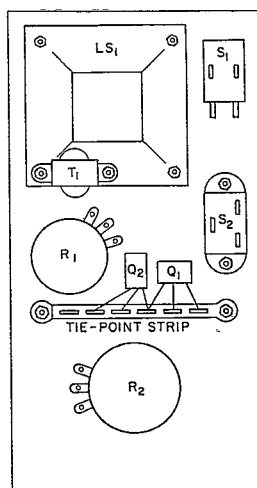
Sketch showing suggested layout of component on one 3×6 -inch face of a $3 \times 6 \times 2$ -inch aluminum box.
